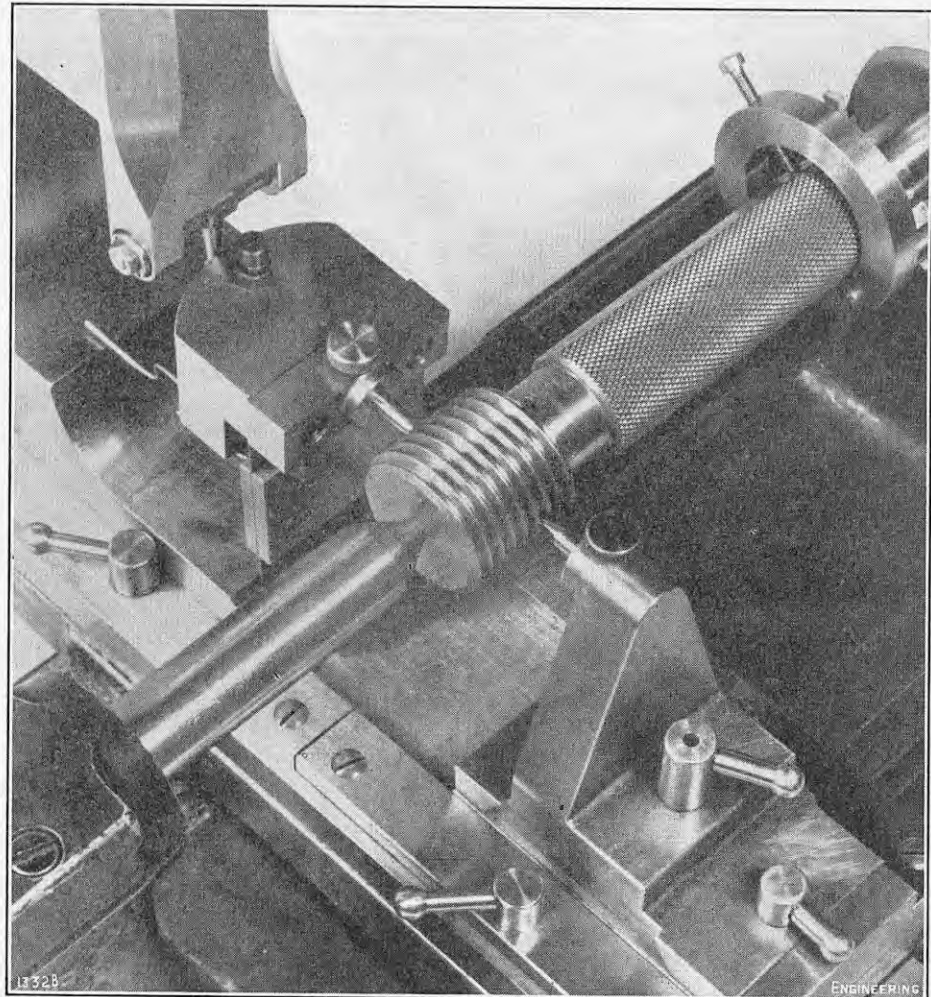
PLUG GAUGE IN POSITION FOR MEASUREMENT.
